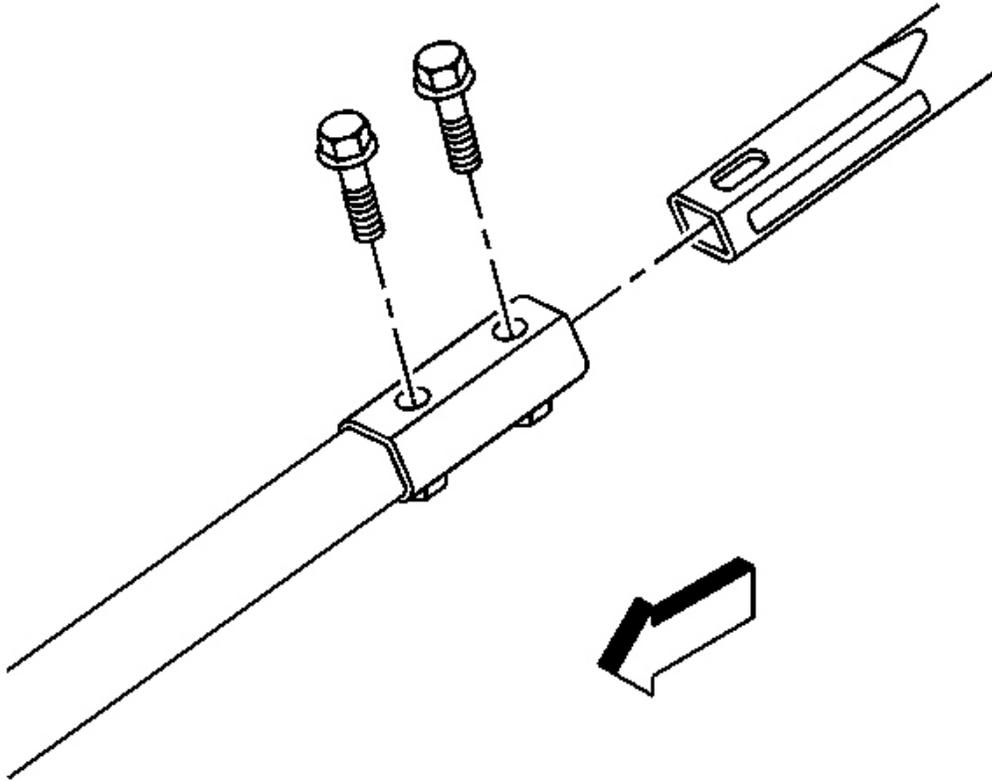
Lower Coupling Pinch Bolt At Steering Gear
